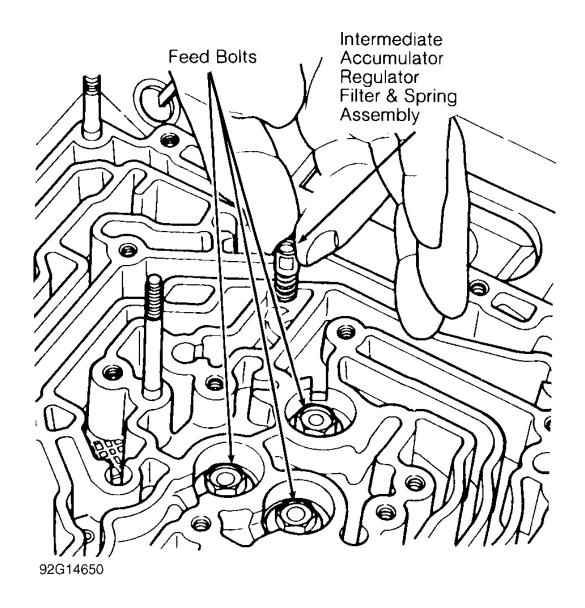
Removing Intermediate Accumulator Regulator Assembly Courtesy of FORD MOTOR CO.
